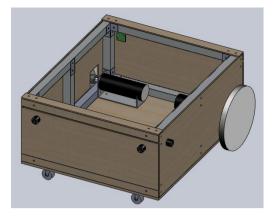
Mechanical Design Version 3 with SolidWorks
